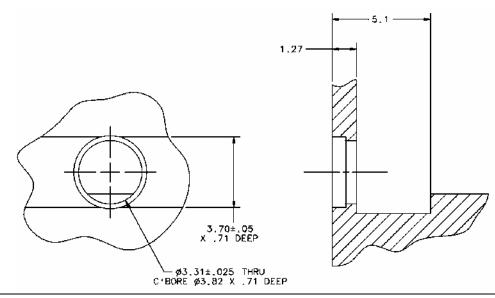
VP100BMS75 Mounting Hole Dimensions and Assembly for a Thin-Wall Housing
